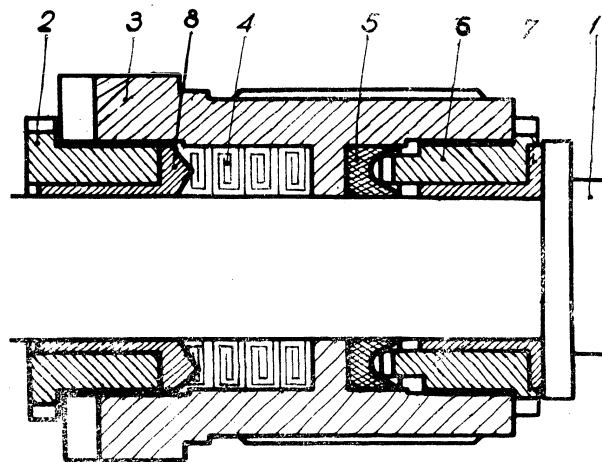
RECOIL BRAKE FRONT STUFFING BOX ASSEMBLY
